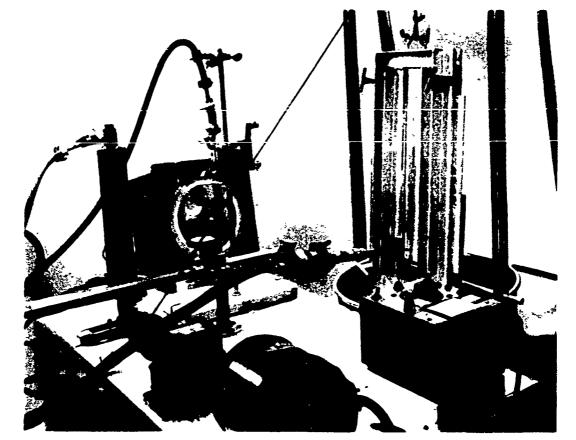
Oxyacetylene flame heating apparatus for local heat treating of welds (Neg. PBC 240)
